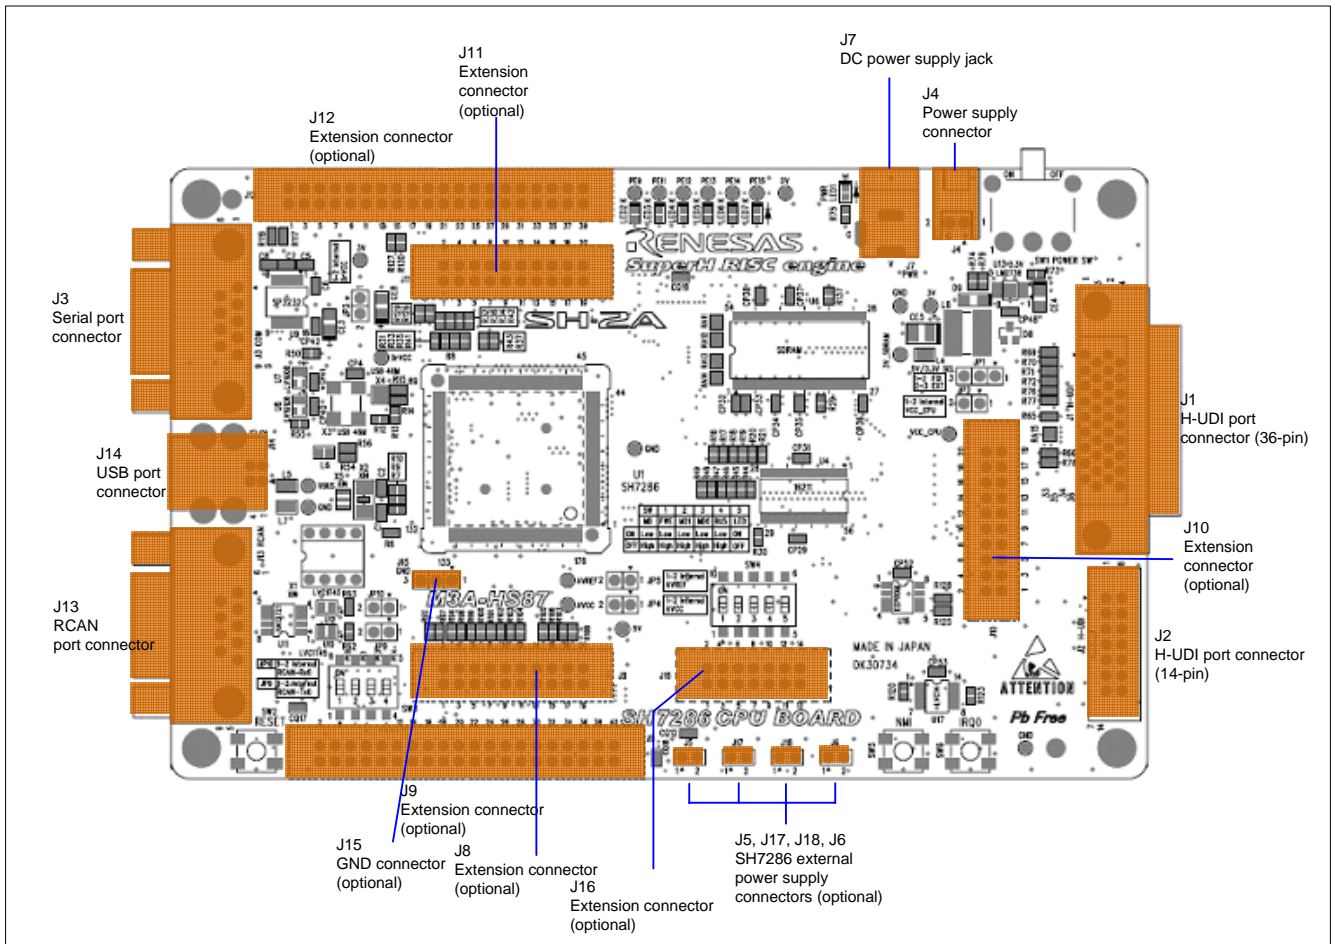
Connector Assignments (Top View of the Component Side)
